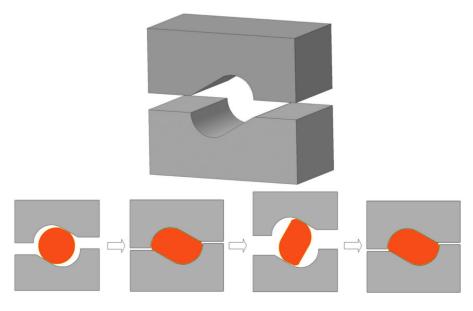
Tool construction and broaching scheme in a new design forging tool.
